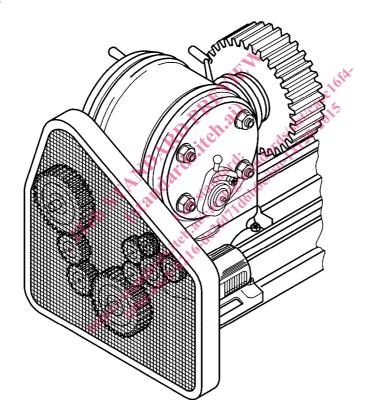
Example of an enclosing guard totally preventing access to transmission machinery
